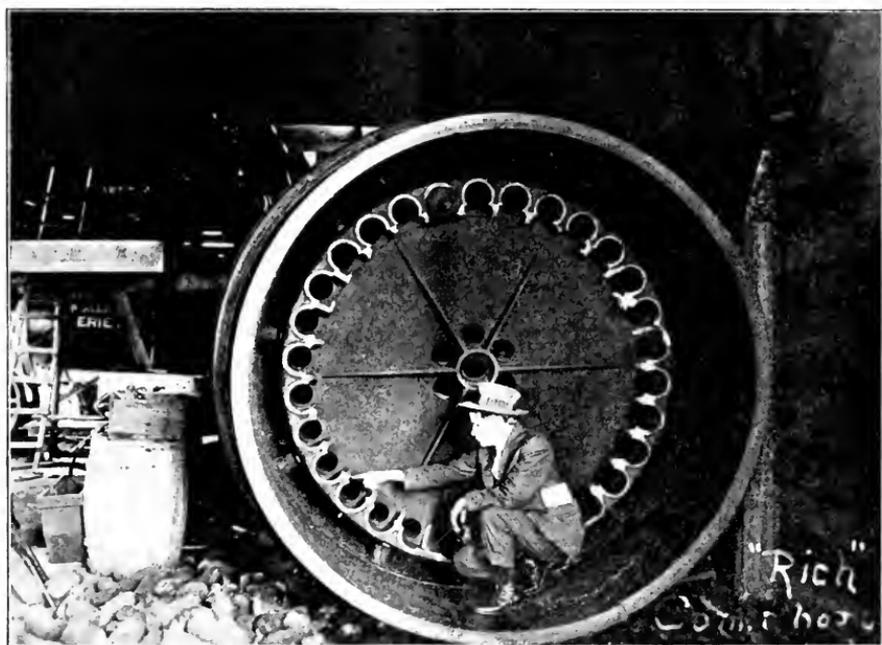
THE INSIDE OF THE EXPLODED DRYER HEAD.
